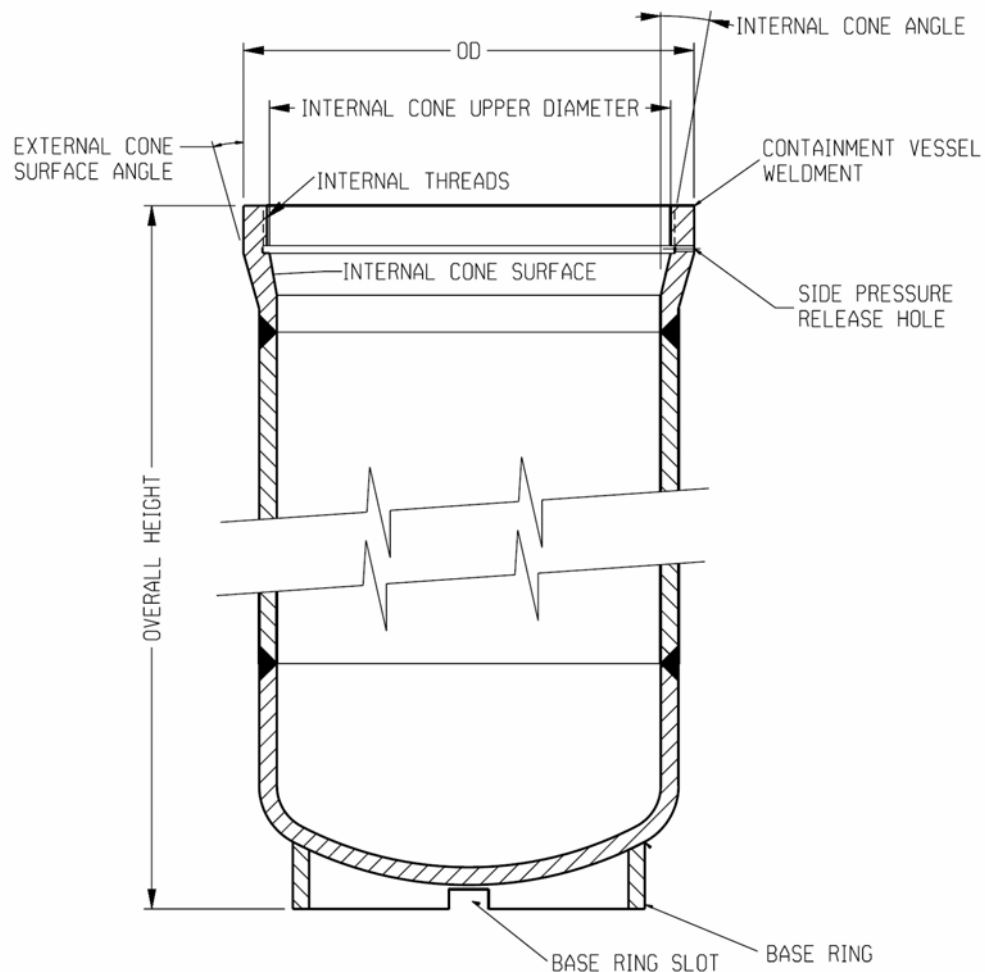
Inspection Diagram for 6CV Weldment
